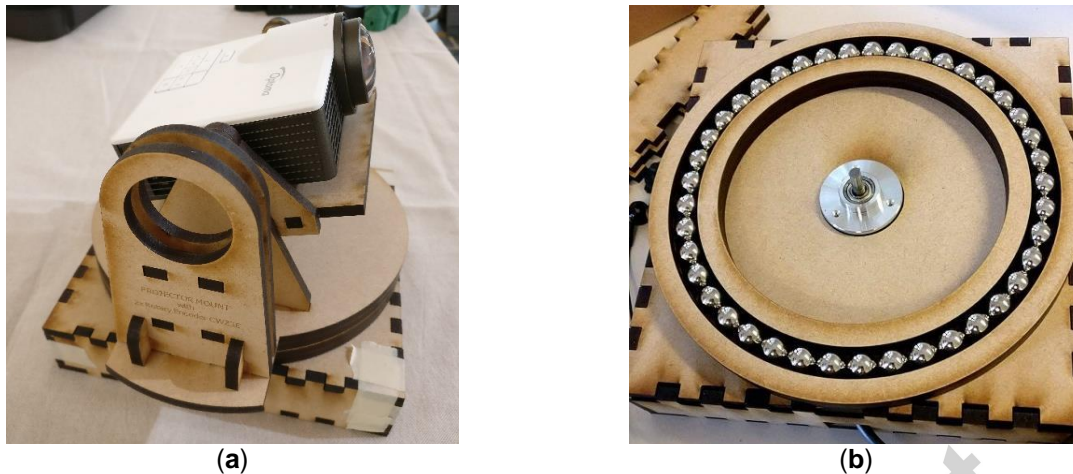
Low-fidelity prototype; (a) a swing-style suspension to maintain the balance of the projector, and (b) a ball bearing system to support the weight of the projector, with a rotary encoder in the center.
